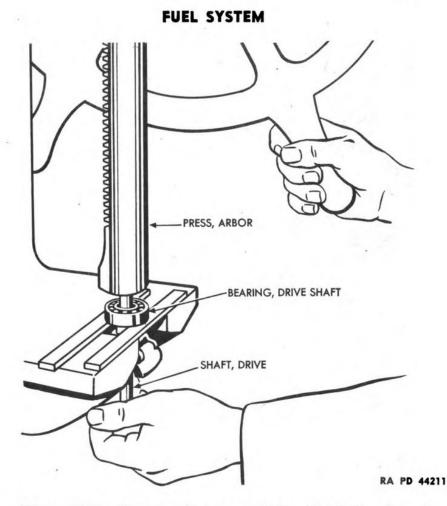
Pressing Governor Drive Shaft Bearing from Drive Shaft
